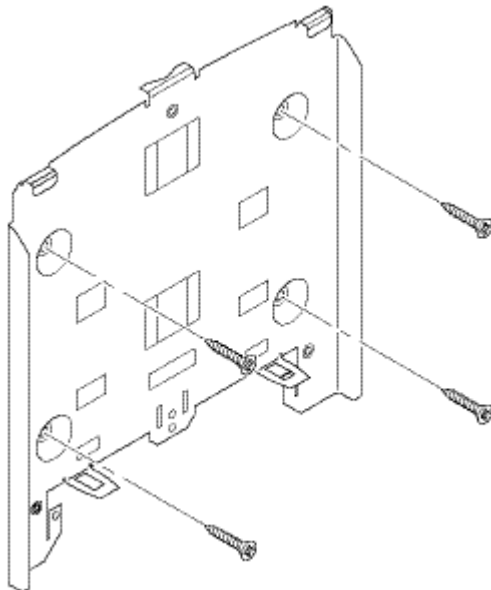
Drilling Template for Fitting the Mounting Plate to a Wall
